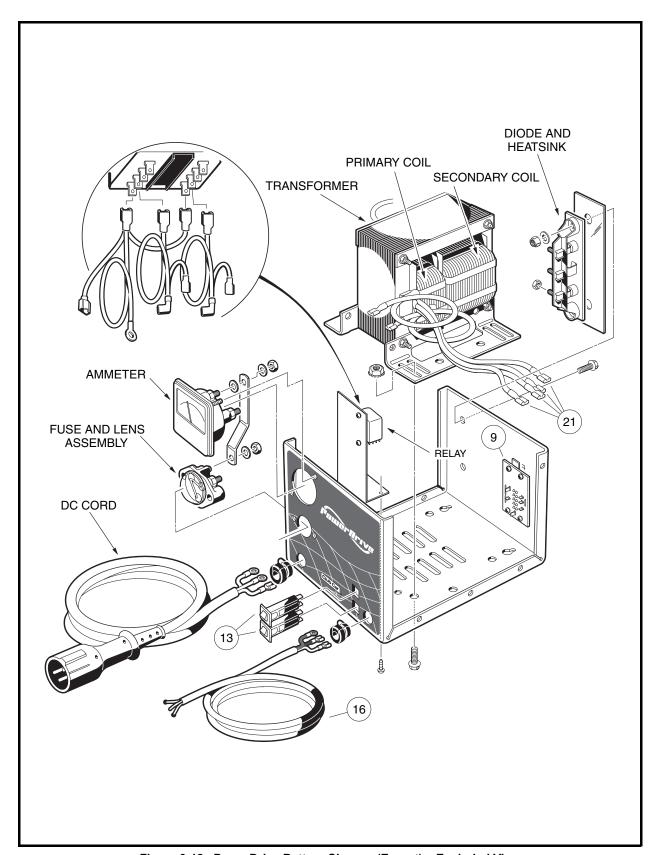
PowerDrive Battery Charger (Export) – Exploded View
